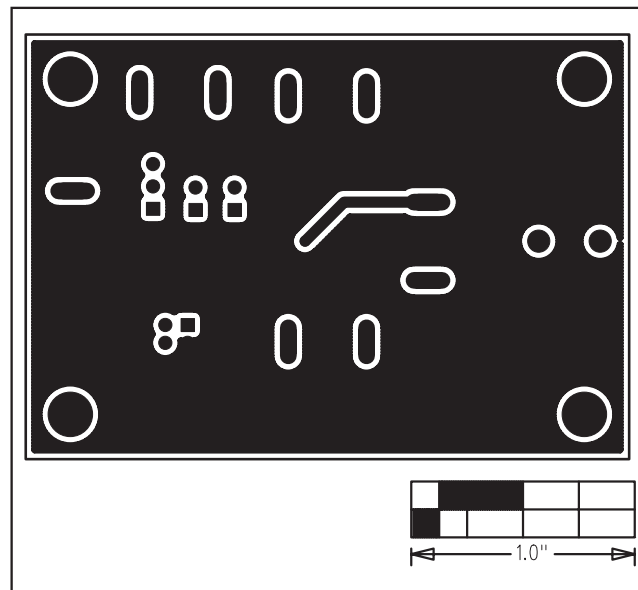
MAX14535E EV Kit PCB Layout—Solder Side
